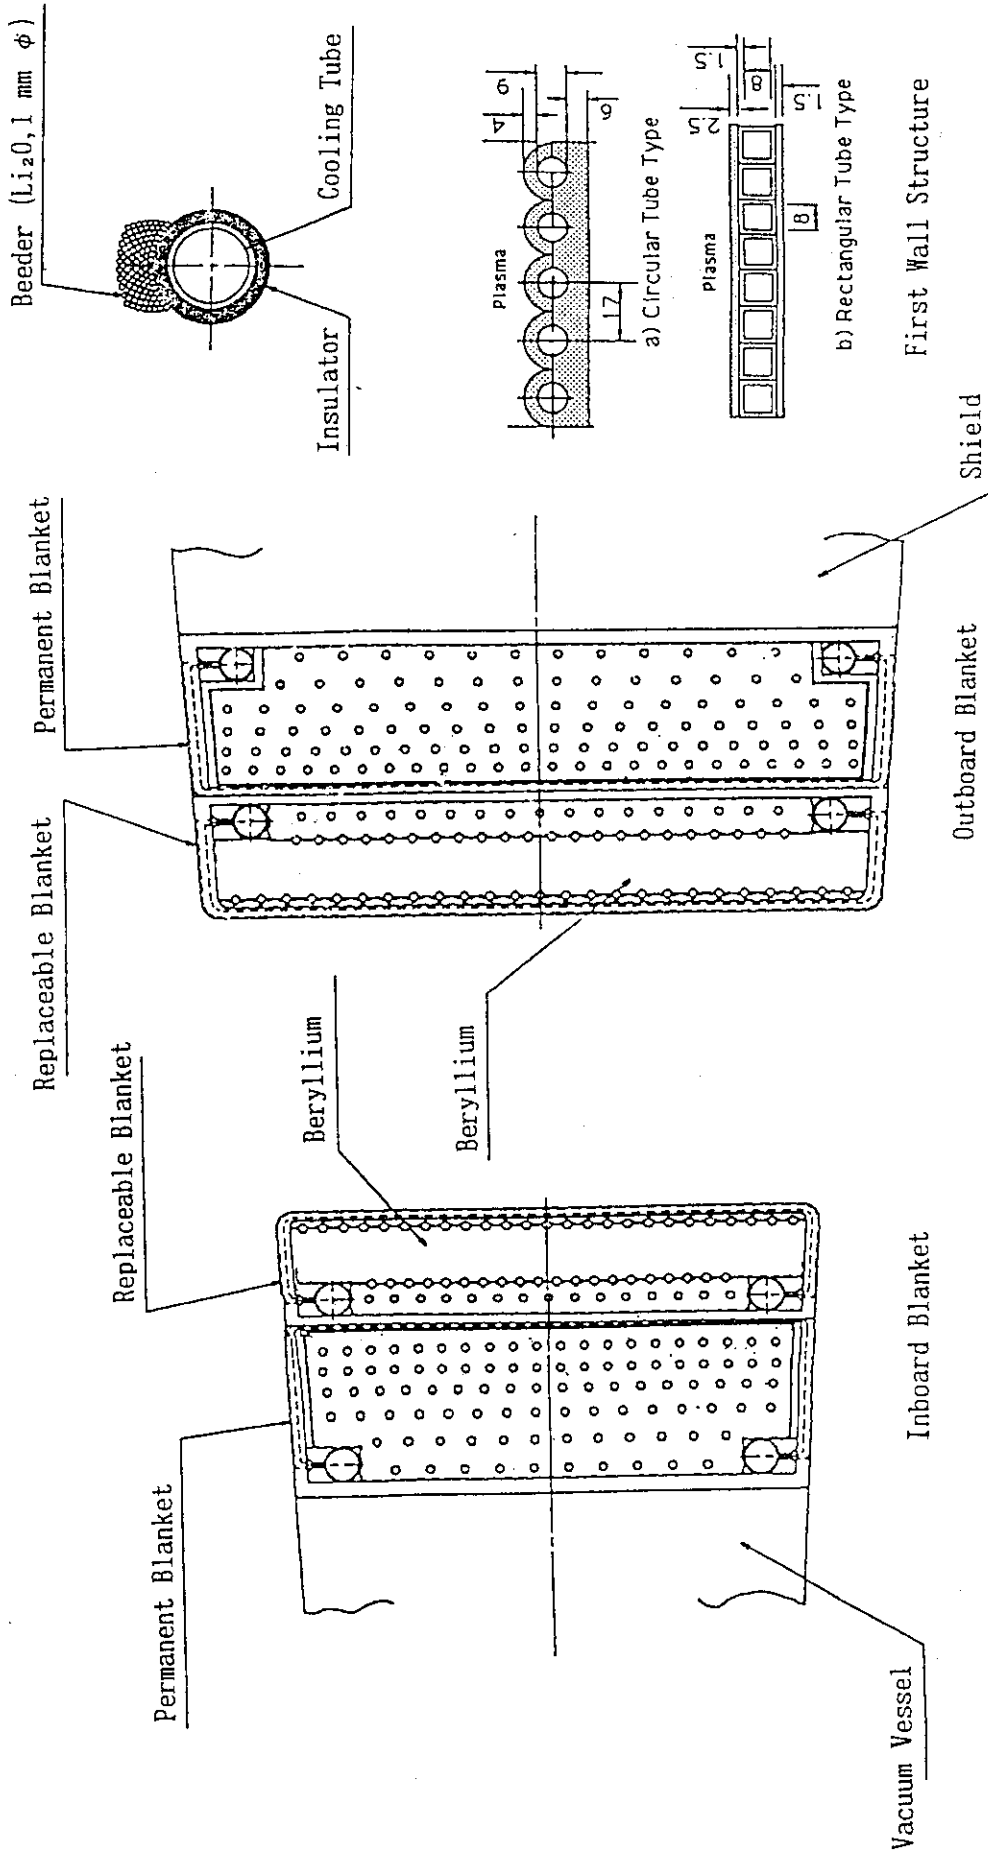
Horizontal cross section of SSTR replaceable blanket.
